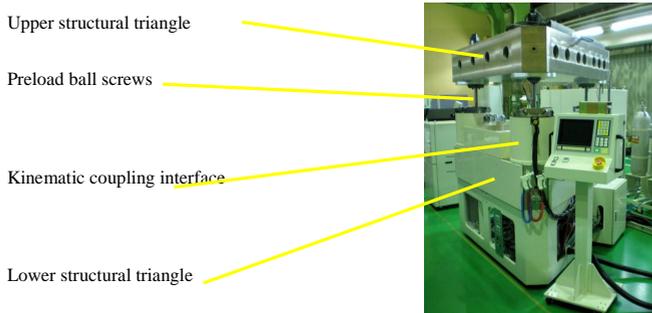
Prototype wafer grinding machine, wheel spindle not mounted/shown yet (would be in center of upper triangle), no grinding tests available yet
